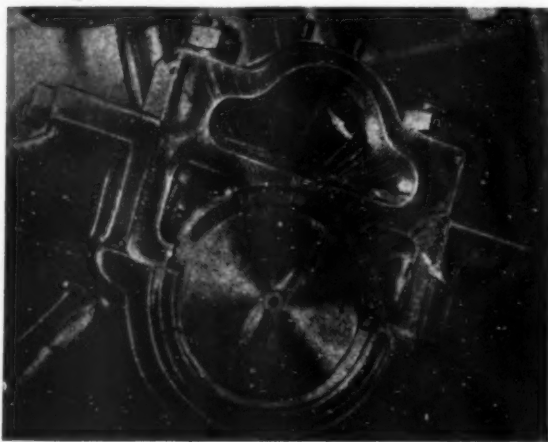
Cracks in the lacquer layer on engine parts under static loading.
